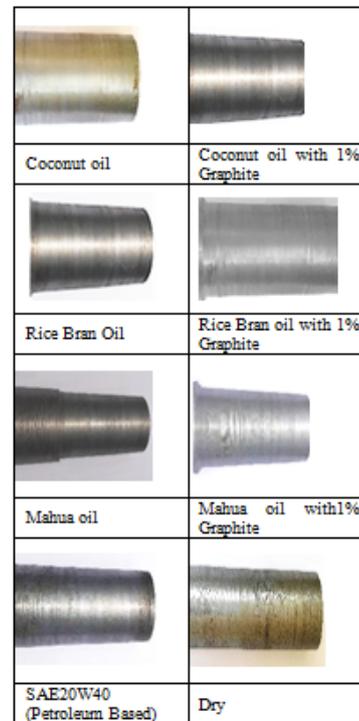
Surface roughness of machined surface using different cutting fluids and at dry condition
